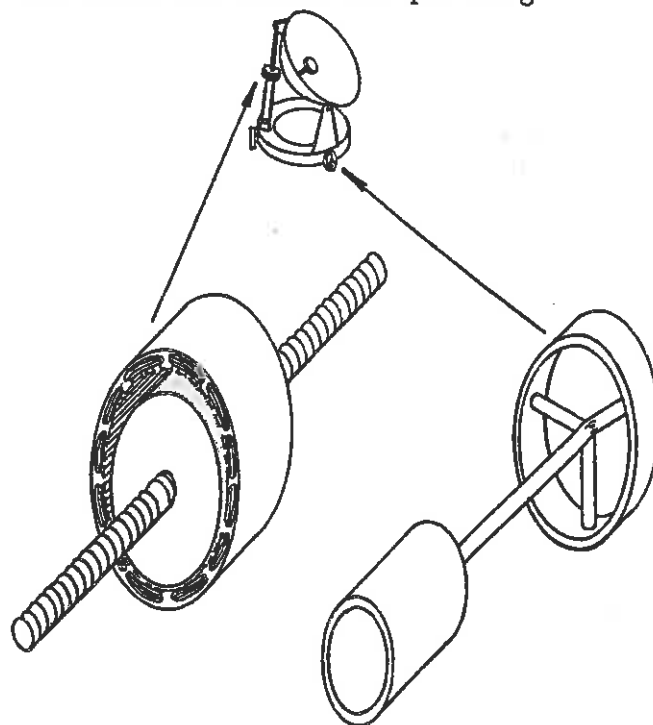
Possible applications for RRSR motors in steering a parabolic solar collector.
